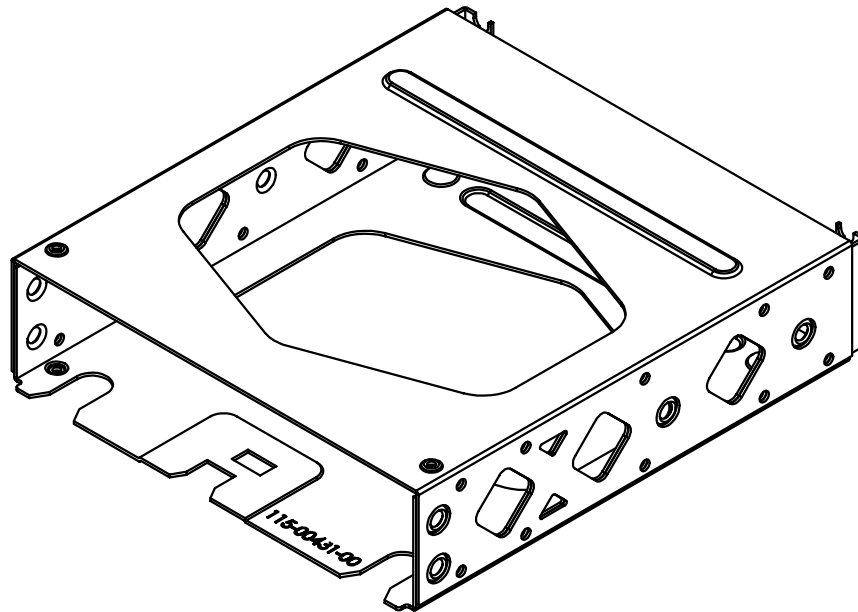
GTX 327 Unit Rack (115-00431-00)
